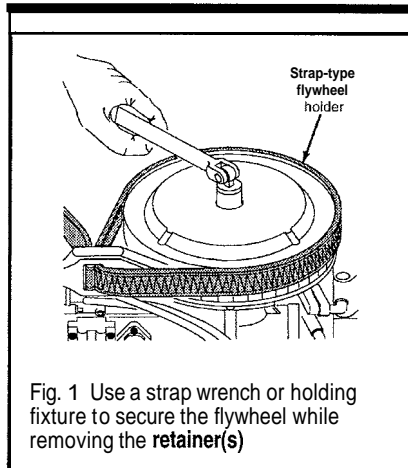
Use a strap wrench or holding fixture to secure the flywheel while removing the retainer(s)
